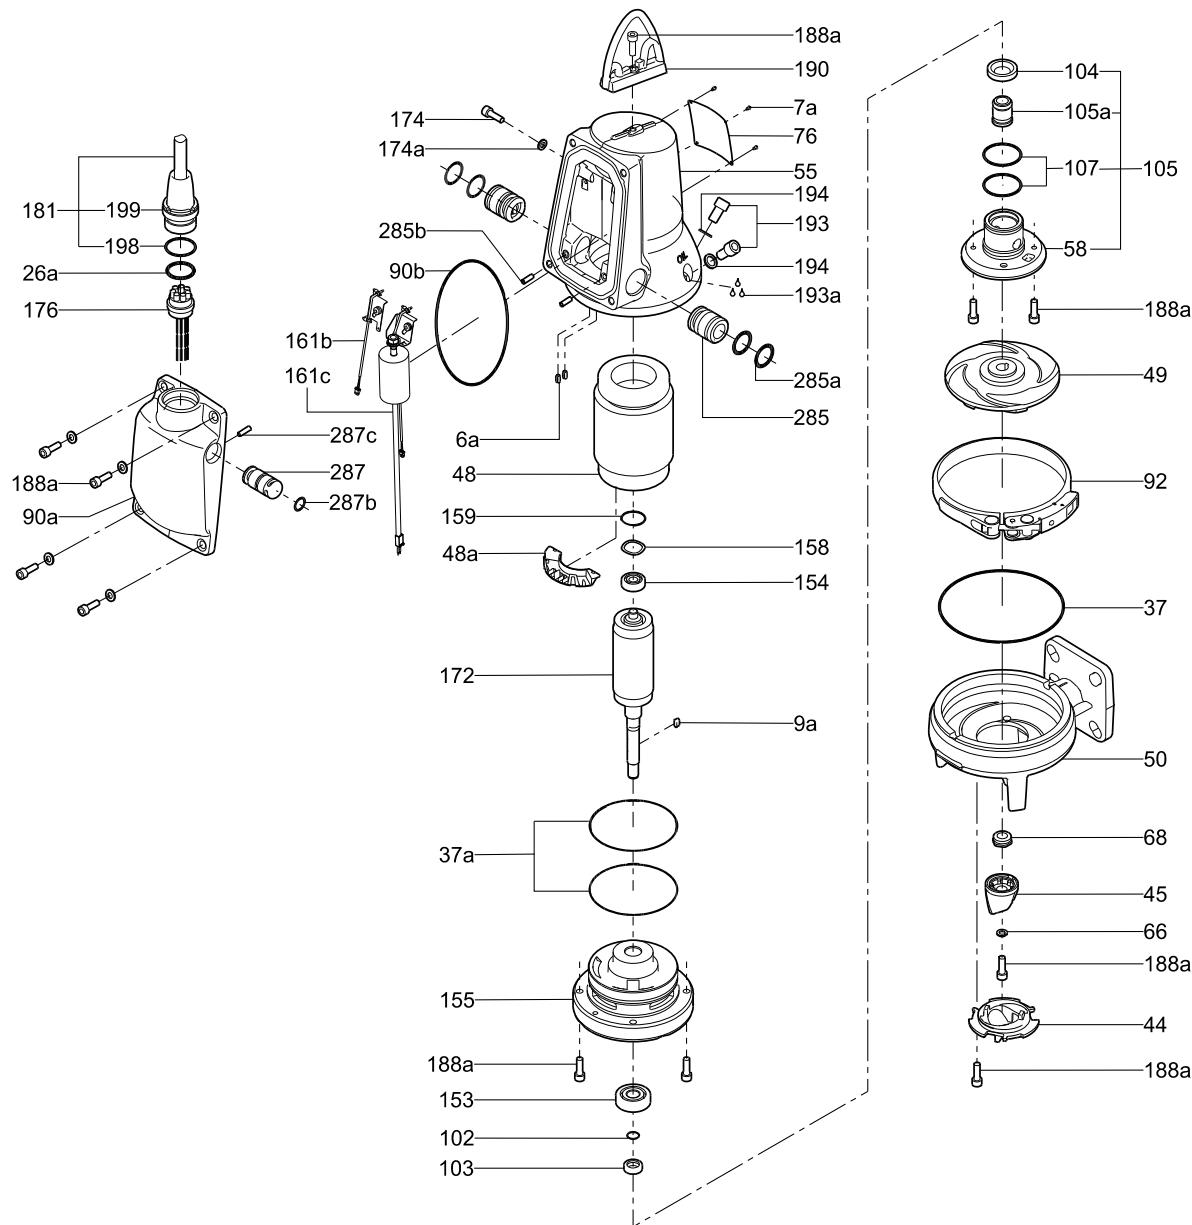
Exploded view of SEG AUTO_{ADAPT} pumps, 0.9, 1.2 and 1.5 kW
